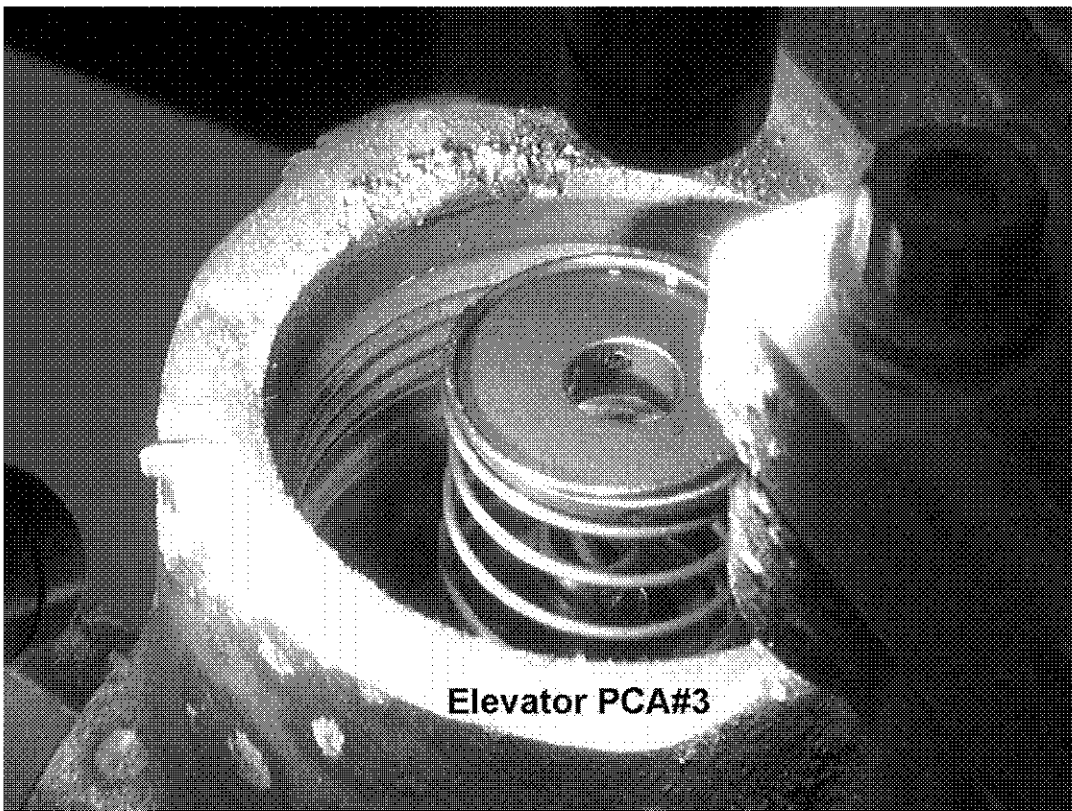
, PCA #3, Bias Spring, Retainer Cap and Shear Pin
